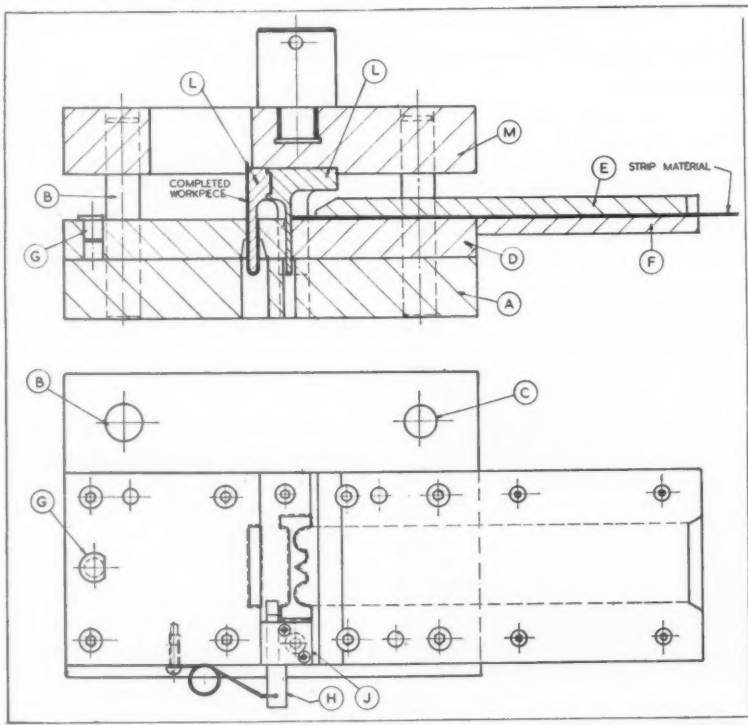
shows the tool. After the initial stroke a piece falls through the lower bolster at every press stroke. A bolster A with pillars B and C locates the die D. A long groove machined in the top surface of the bolster is a more satisfactory way of locating the die than relying on dowels as the groove gives greater accuracy when finally assembling the various members.
